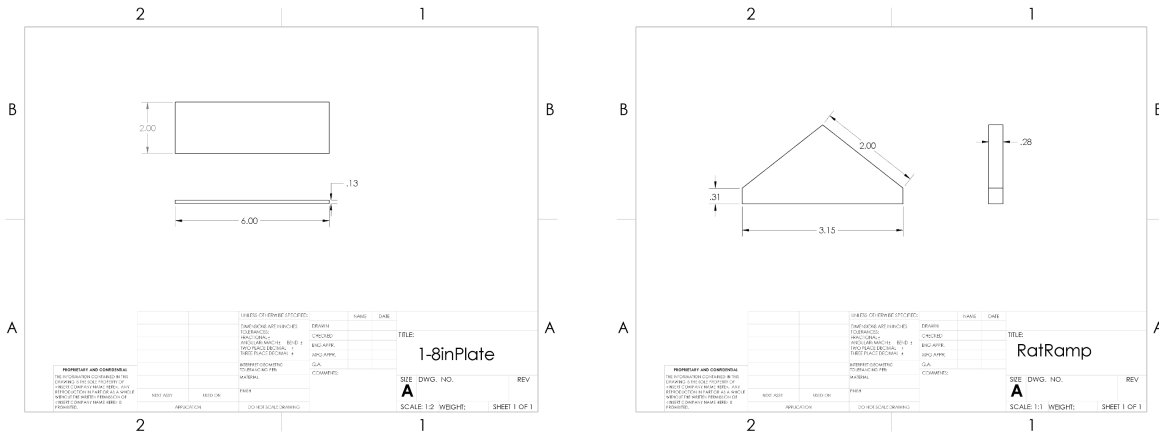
Drawings of 3D printed riser (left) and ramp (right)
